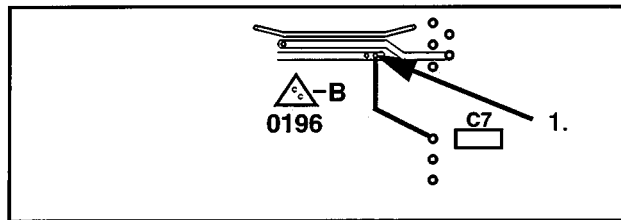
CL-GD7555 Power Supply Module for Demonstration Board (Solder Side)
